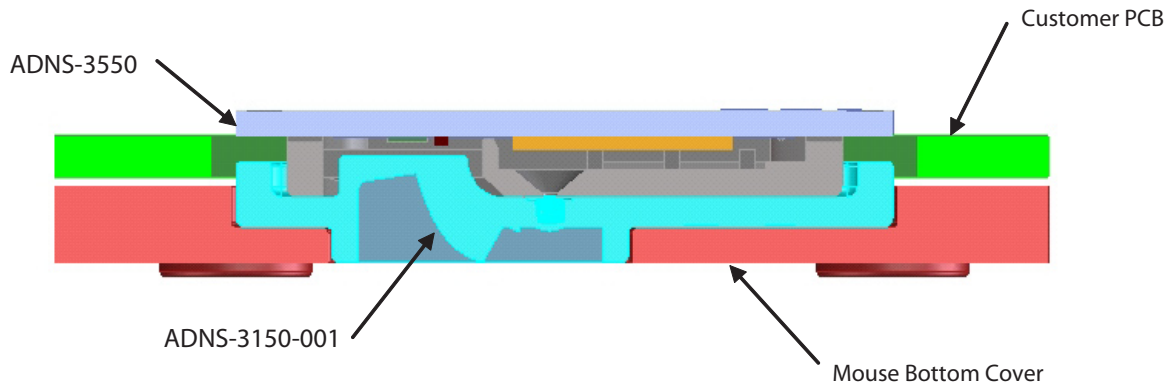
2D Assembly drawing of ADNS-3550 (Mounted on the top side of customer PCB)
